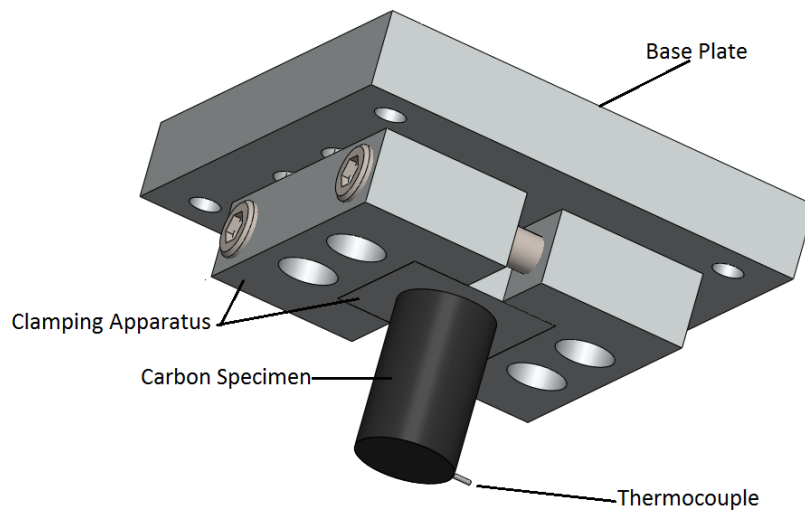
TRIBOMETER CLAMP ASSEMBLY
